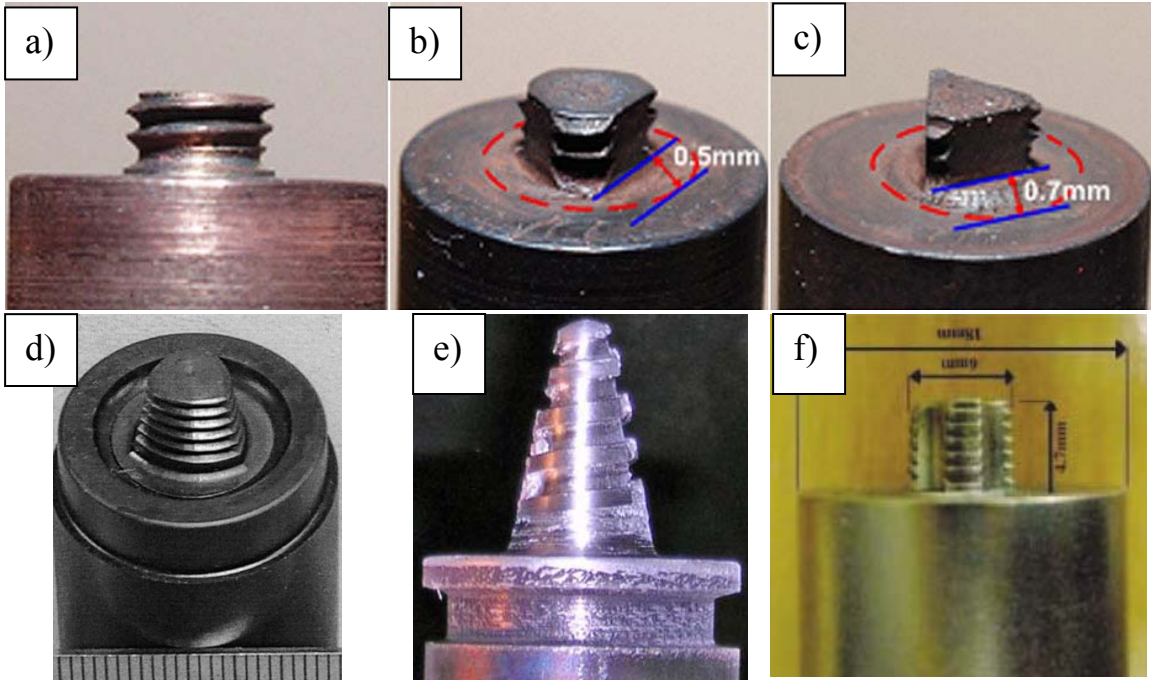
Commonly used tool pin geometries (a) cylindrical threaded, (b) three-flat threaded (c) triangular (d) trivex (e) threaded conical (f) four-flute threaded pin [2]
